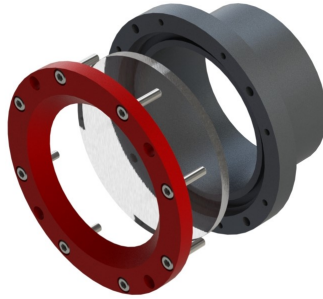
Aurora External Forward Camera Enclosure Sectioned Viewport
